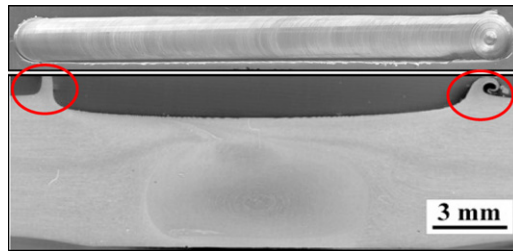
Experimental flash formation during welding (top view and transverse cross section) of aluminium under standard welding conditions.
